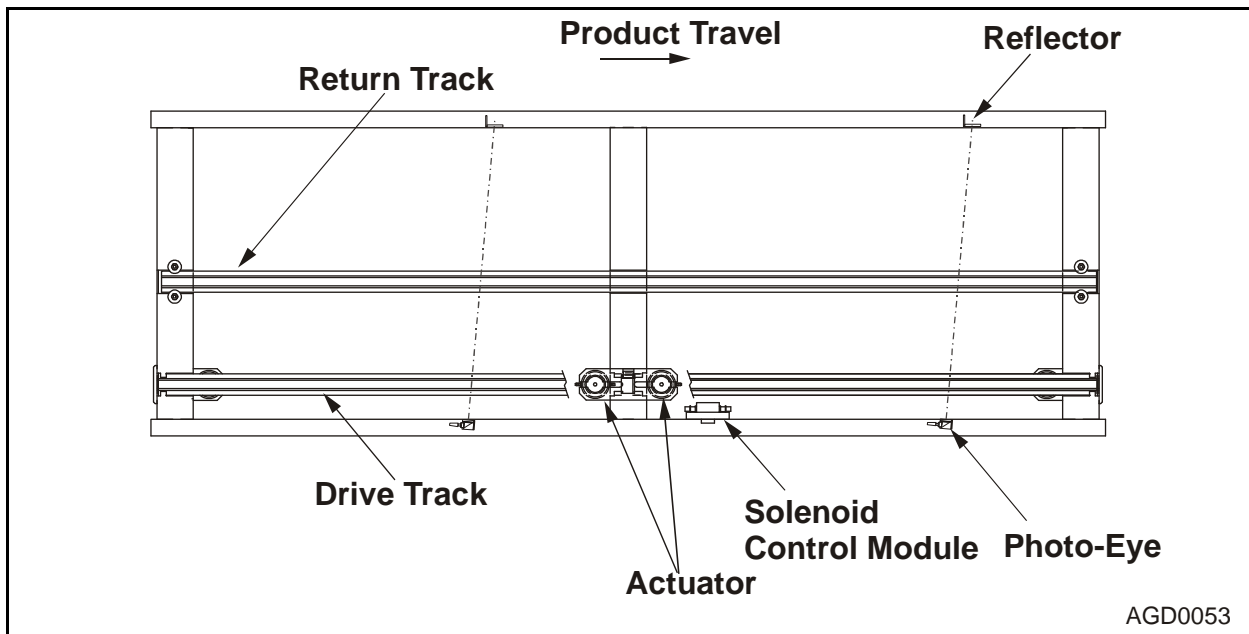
3 Intermediate Straight Section (RH Assembly Shown)
